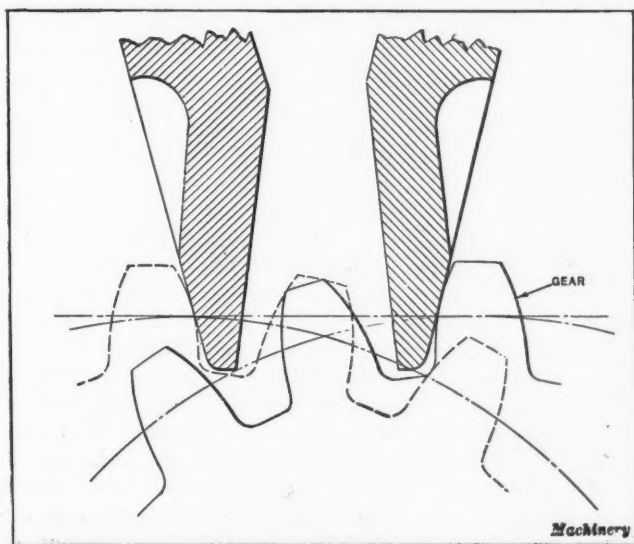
Method of using Two Grinding Wheels on a Generating Type of Machine
